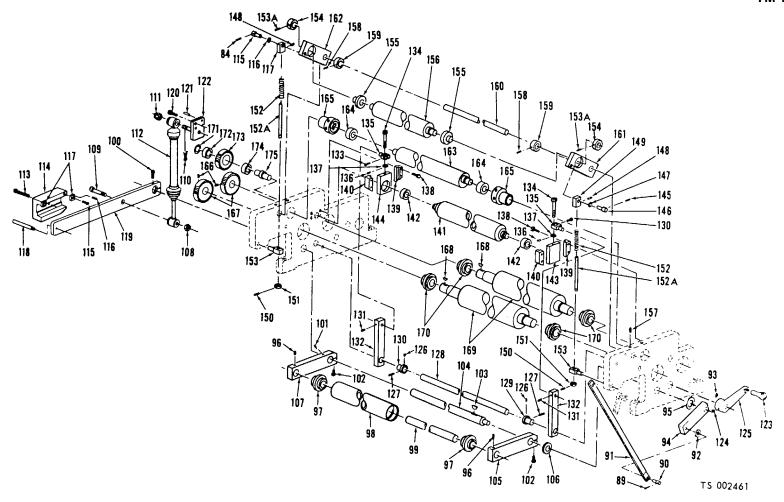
Feeder assembly (Sheet 3 of 5)
